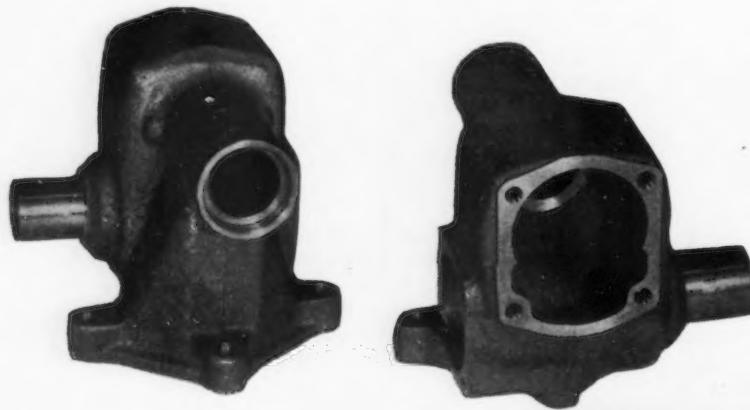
shows two views of the steering gear case on which a large number of boring, counterboring, facing, drilling and tapping operations are performed. Formerly four standard turning machines, one multiple drill, one multiple tapper and one pedestal countersinking machine were used to machine the housings. To get at various faces of the part, three handlings were required for boring and drilling, three for tapping and three for countersinking holes. Production under these conditions reached 20 housings an hour.
